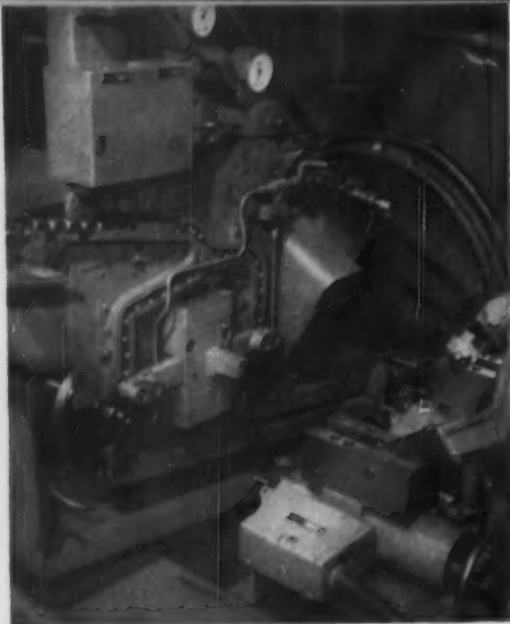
Storage racks feed blanks to branch chute on two-spindle Borematic machines.
